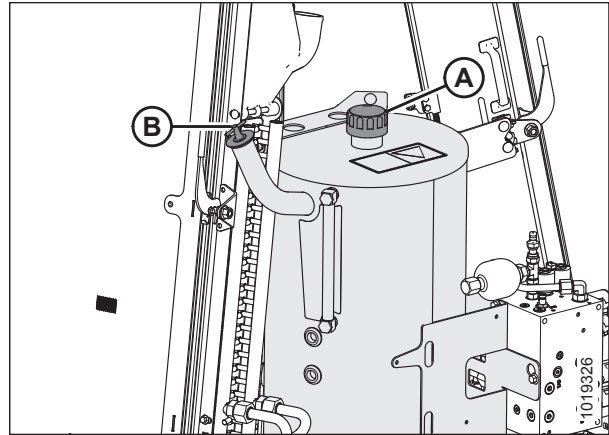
Hydraulic Oil Filler Neck and Breather Tube
